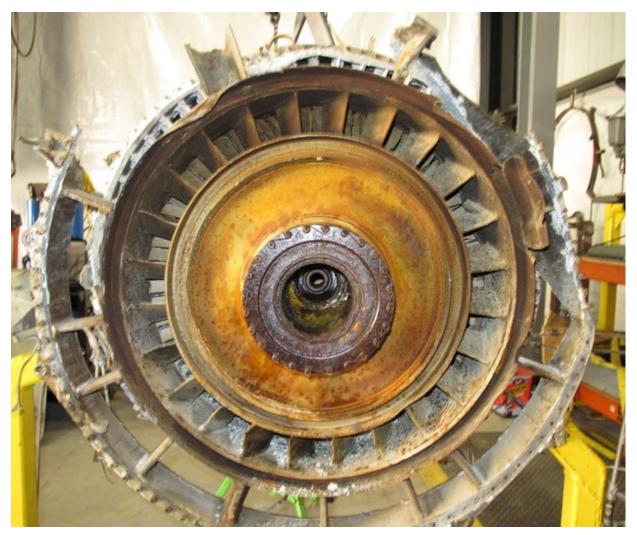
No. 1 engine low compressor aft view showing missing/displaced IMC rail section
